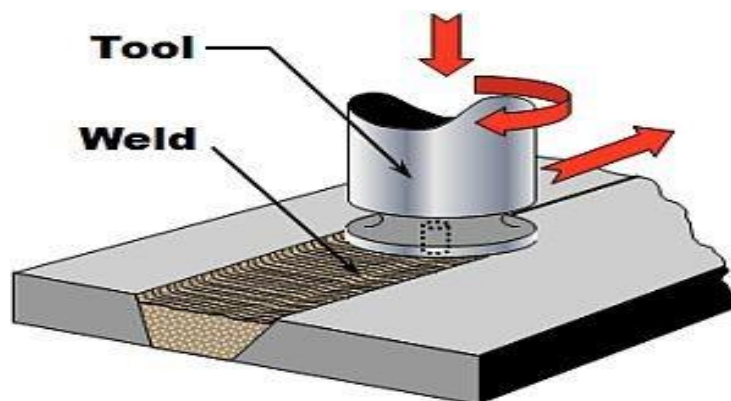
Schematic diagram of the Friction Stir welding Process [3]
